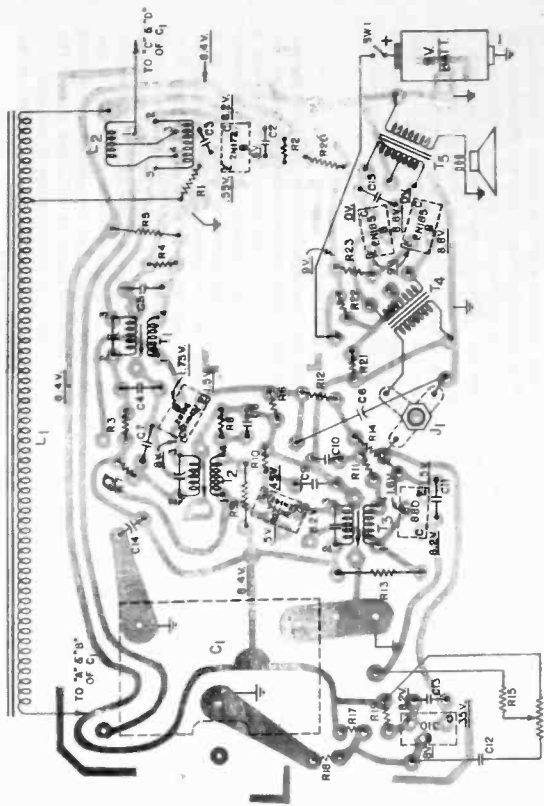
Bottom View of Printed Board Showing Top Components Symbolically
